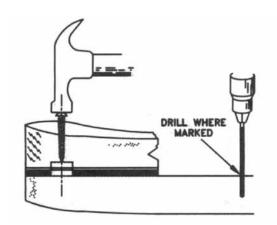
Method used to locate screw holes in a buttstock for securing recoil pad.
